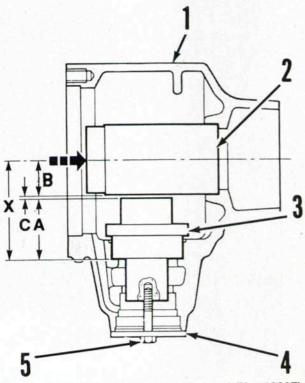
On APL-355 axle, a special tool (No. 12237) is used during adjustment of pinion engagement setting. Refer to text.
